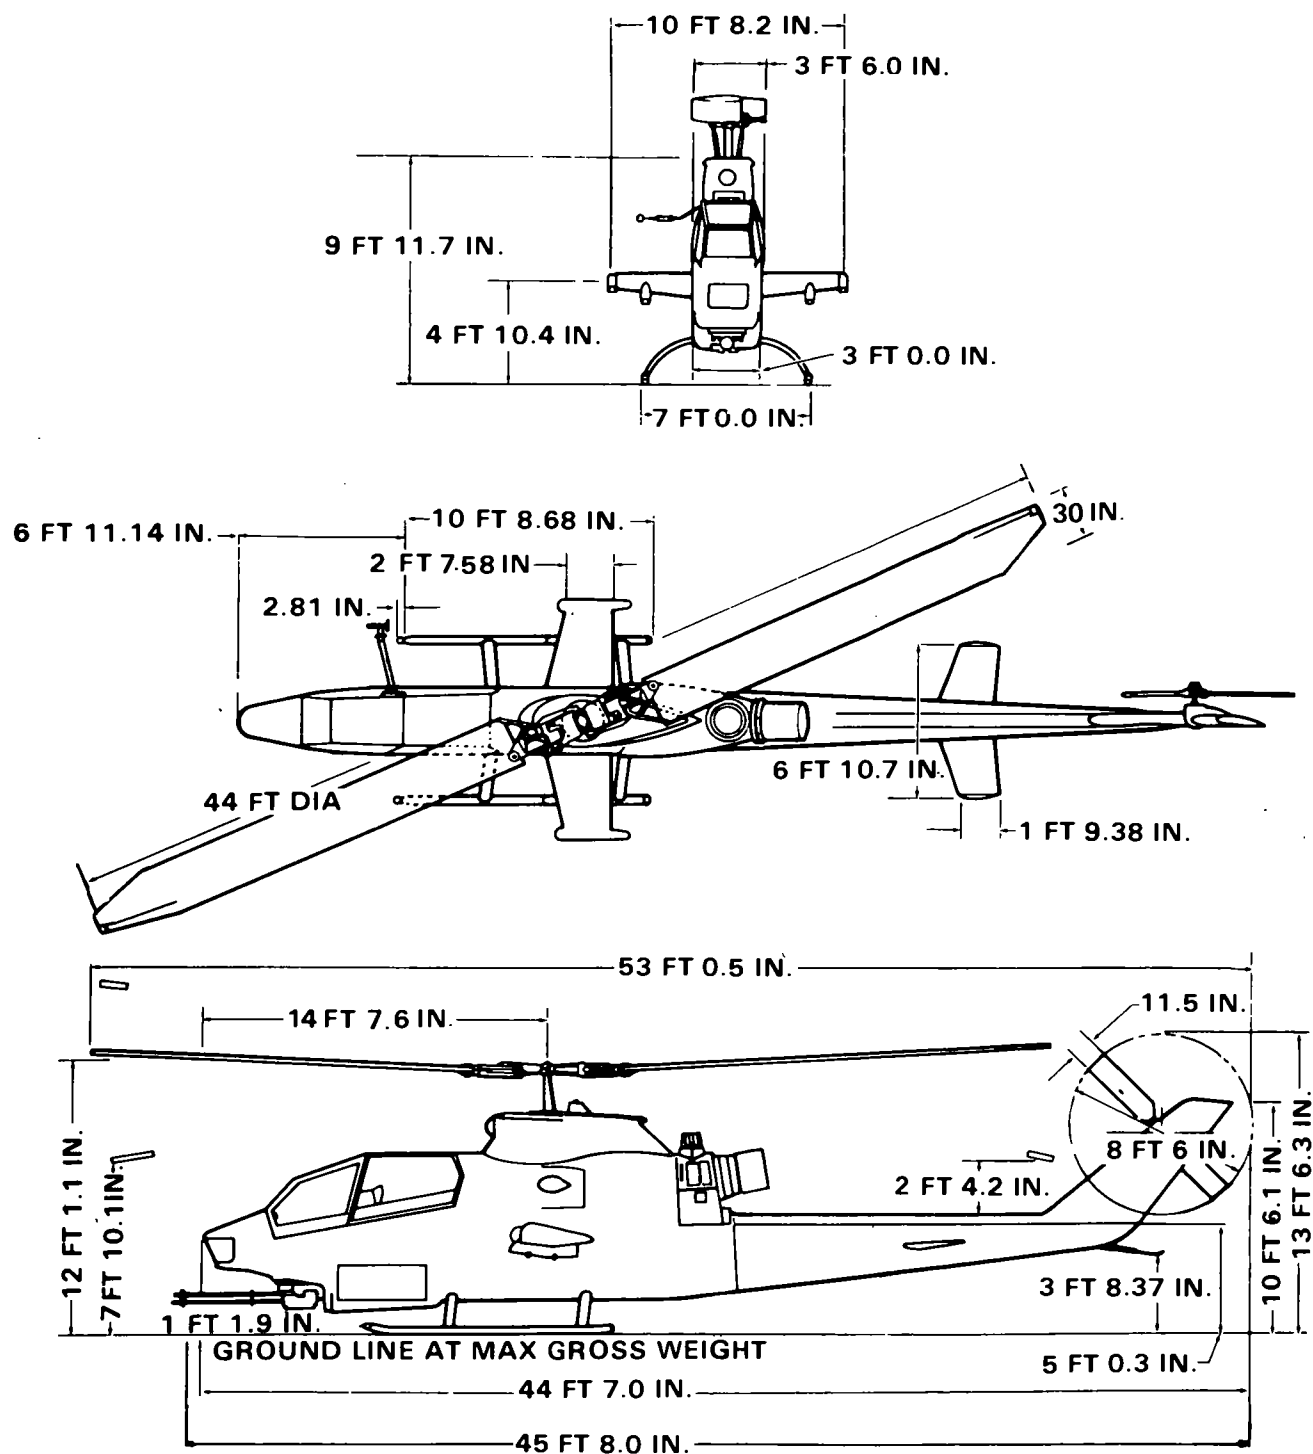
Principal Dimensions AH-1S (Modernized)
